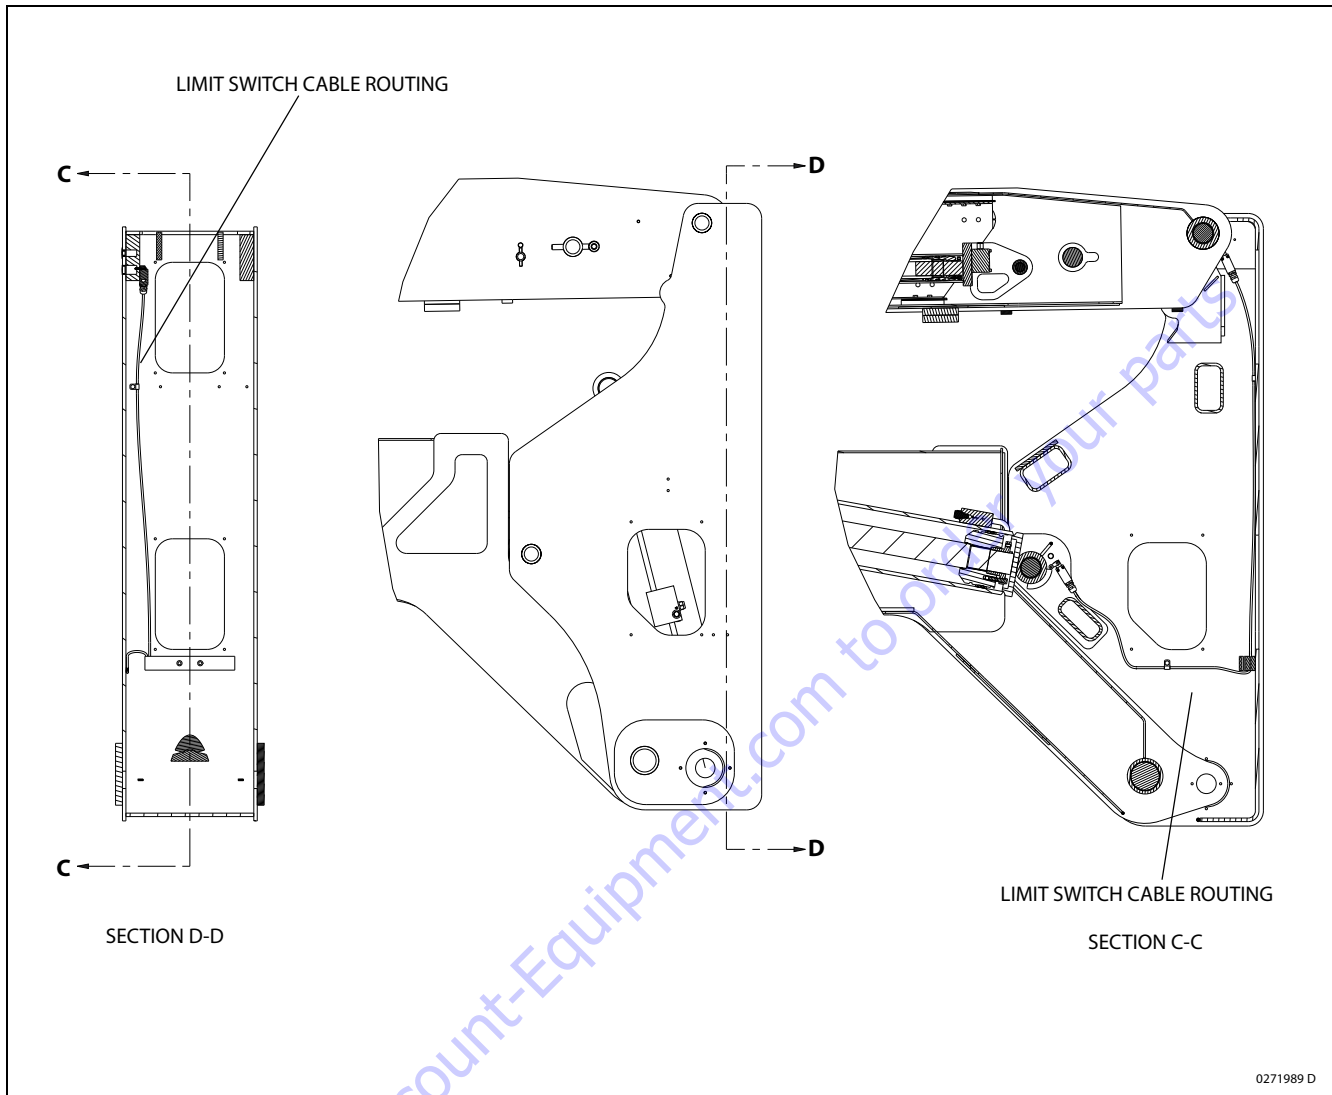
Boom Valve and Limit Switches Location (Sheet 2 of 2)
